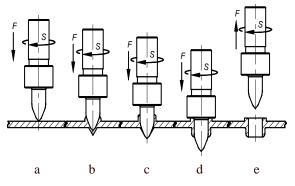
Friction drilling steps: a - initial contact; b - tool-tip penetration to the material; c - material flow; d - collar forming; e - tool withdrawal
